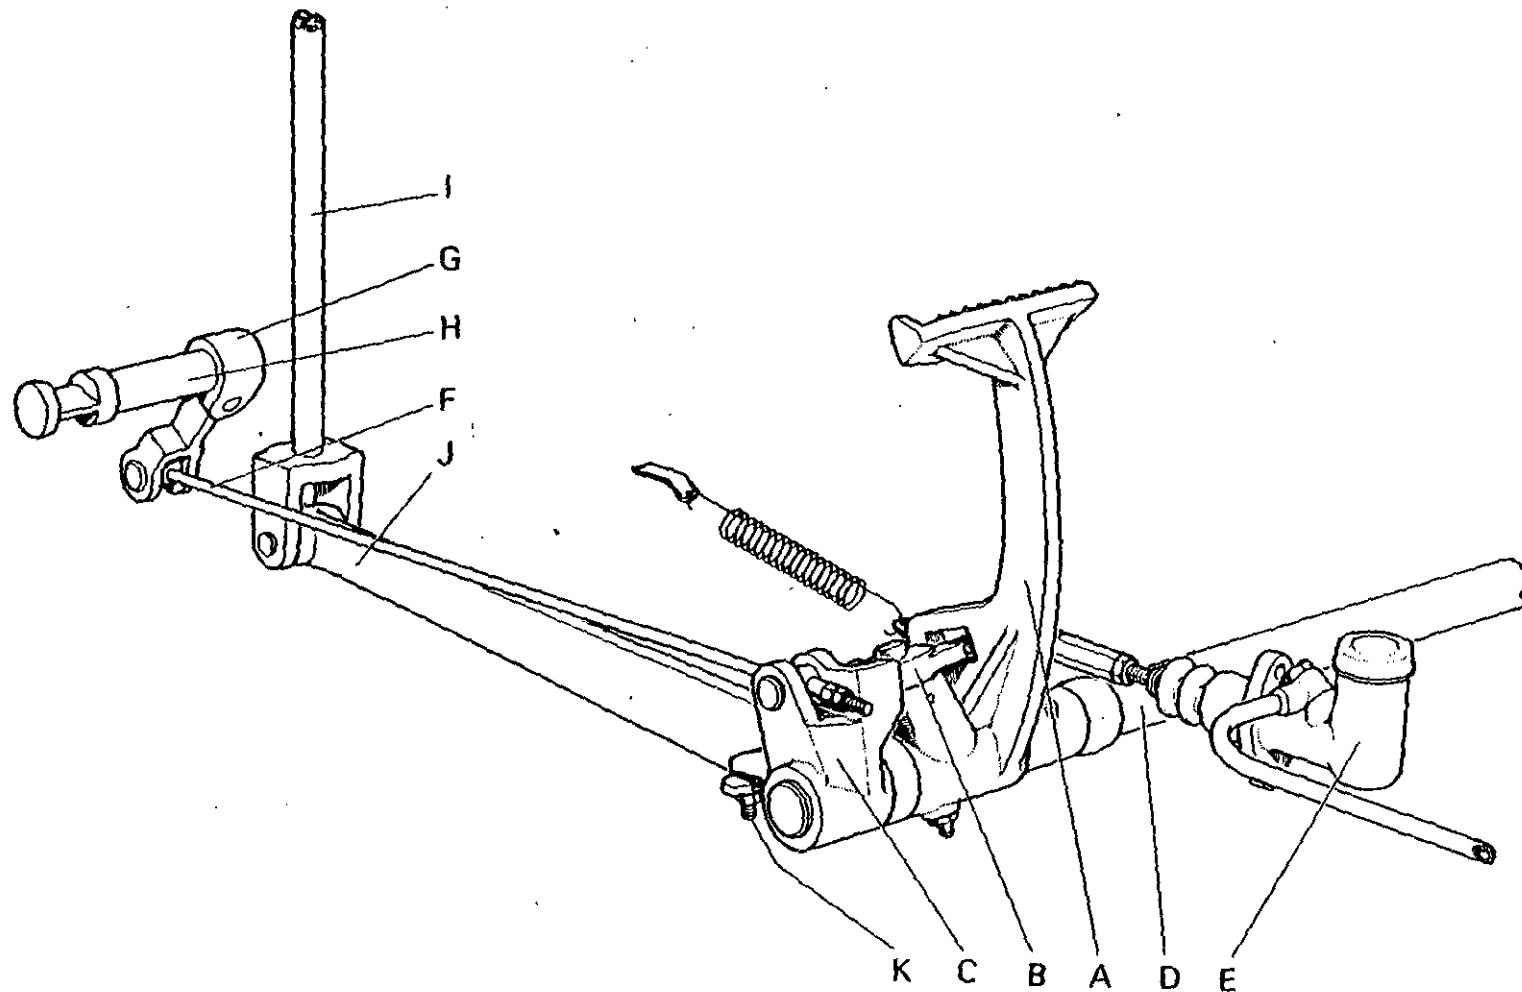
FOUR-WHEEL BRAKE MECHANISM
